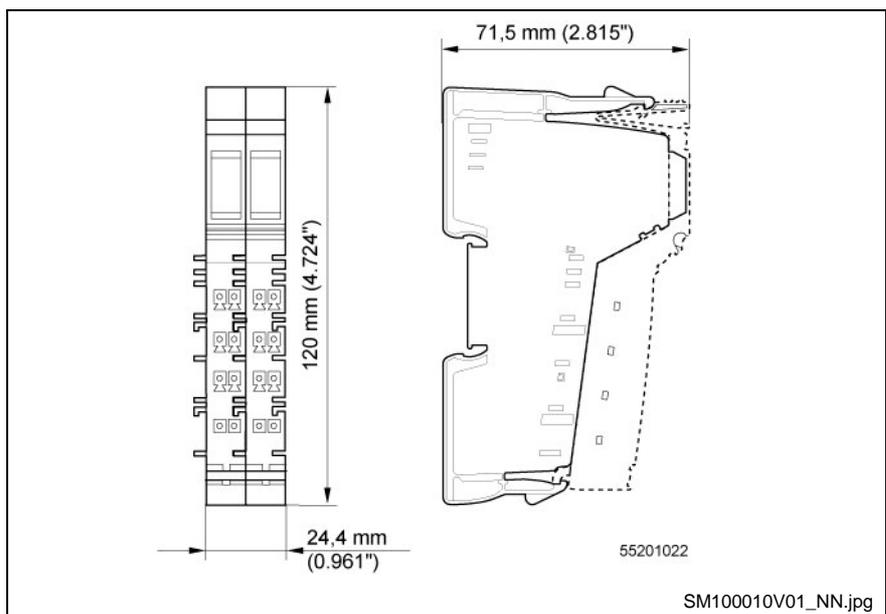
Dimensions of the electronic sockets (four-fold enclosure)
